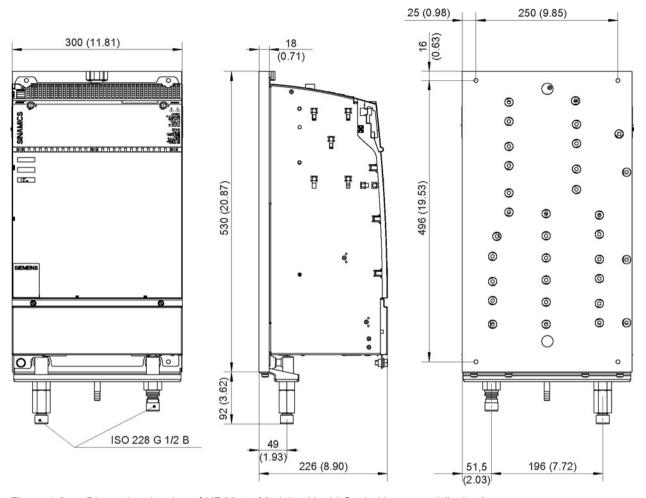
Dimension drawing of HF Motor Modules Liquid Cooled in mm and (inches)
